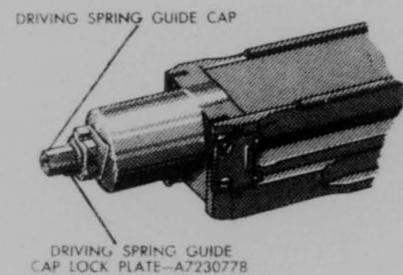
Removal of Driving Spring Guide Cap and Cap Lock Plate.
